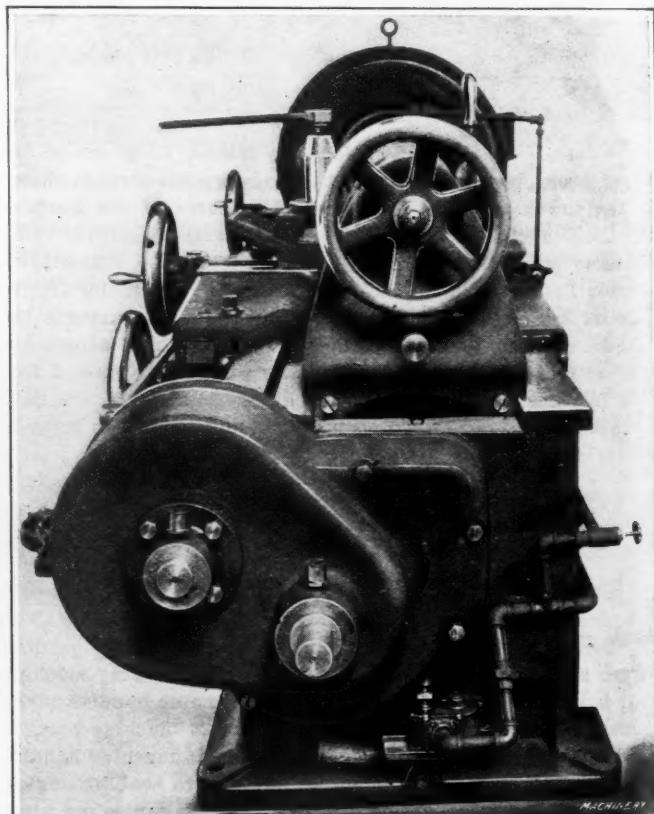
End View of Niles-Bement-Pond No. 3 Axle Lathe
